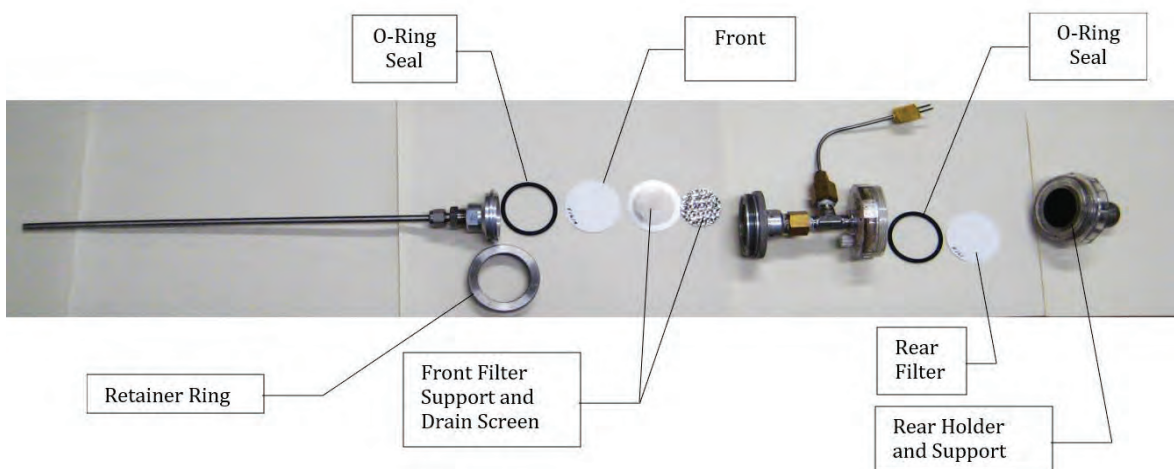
Exploded View of Sample Probe Assembly used by OMNI
